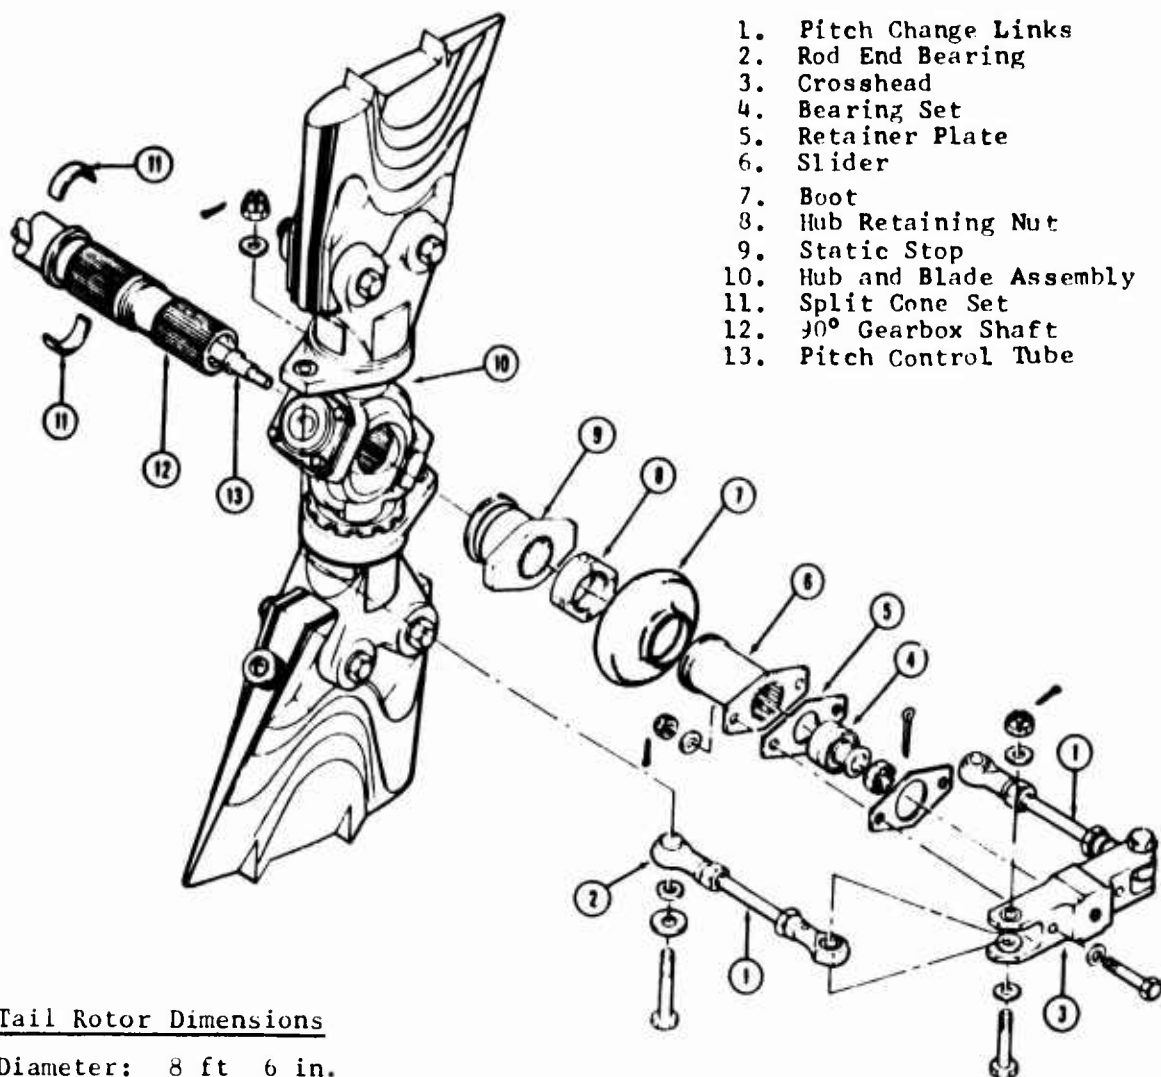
UH-1/AH-1 Tail Rotor Hub and Blade Assembly and Pitch Control Mechanism Diagram.
